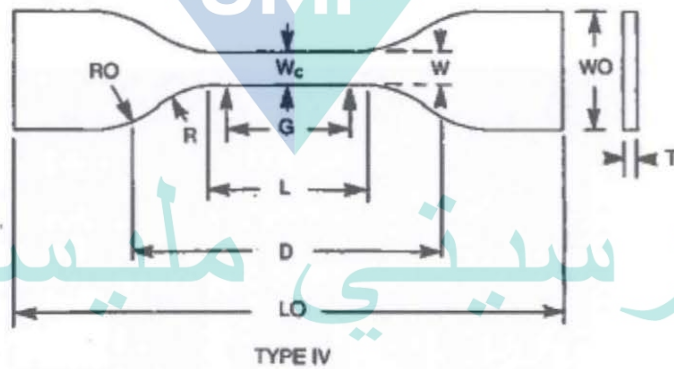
Dumbbell shaped specimen dimension for Type IV
